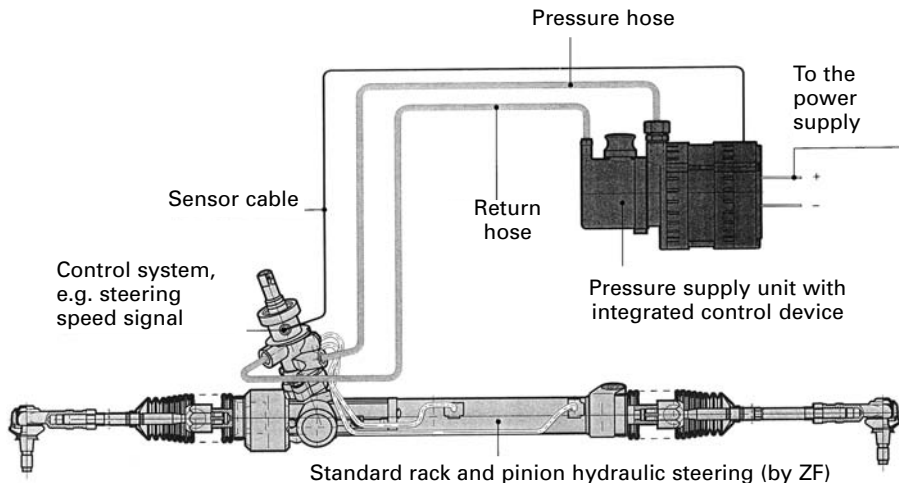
Open-centre control system from ZF. The pressure supply unit designed as a modular unit can be fitted with different electric motors (DC motor with or without brushes) and pump fuel feed volumes ($1.25\text{--}1.75\text{ cm}^3$ per rpm) depending on its particular function. Oil tanks for horizontal or vertical installation are also available. Operating pressure is up to 120 bar, with a maximum power consumption of 80 A.
